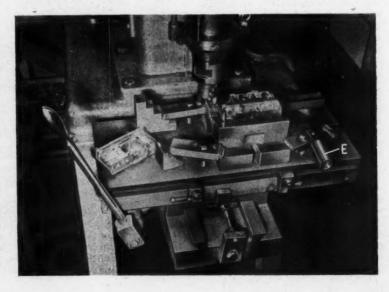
Machining of the surface of the film gate at the rear of the camera body is performed with a two-tool cutter on this Paatz vertical milling machine
